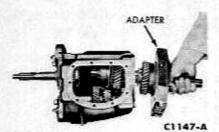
Overdrive Adapter and Transmission Output Shaft Removal
